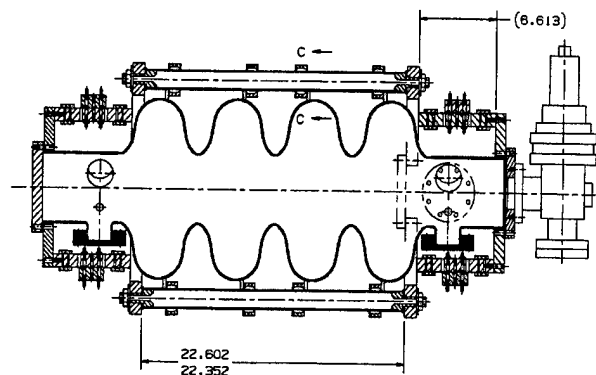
Sectional engineering drawing of the 4-cell 805-MHz cavity.
